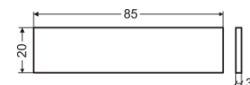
Shapes and dimensions of samples for fatigue tests as per PN-76/H/04326-5
